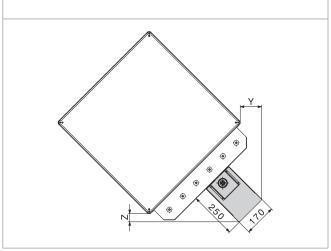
Dimension sheet adapter for Krivan / design S (in mm)
